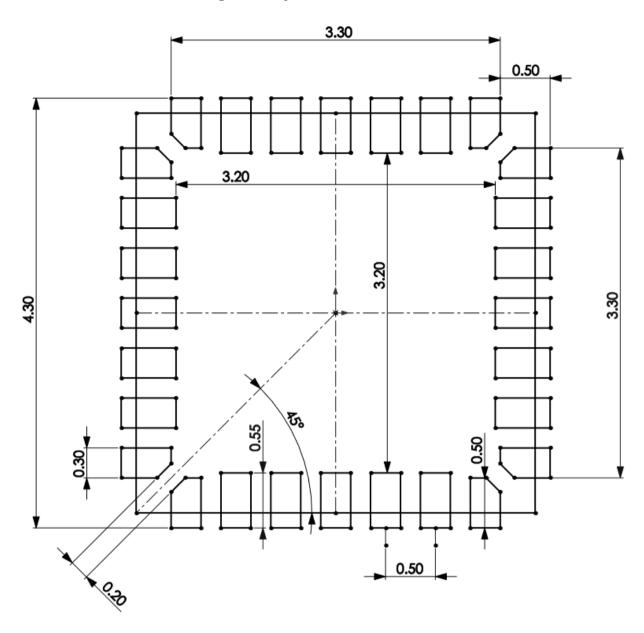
QFN(4x4)-28 Footprint (dimensions in millimetres)
